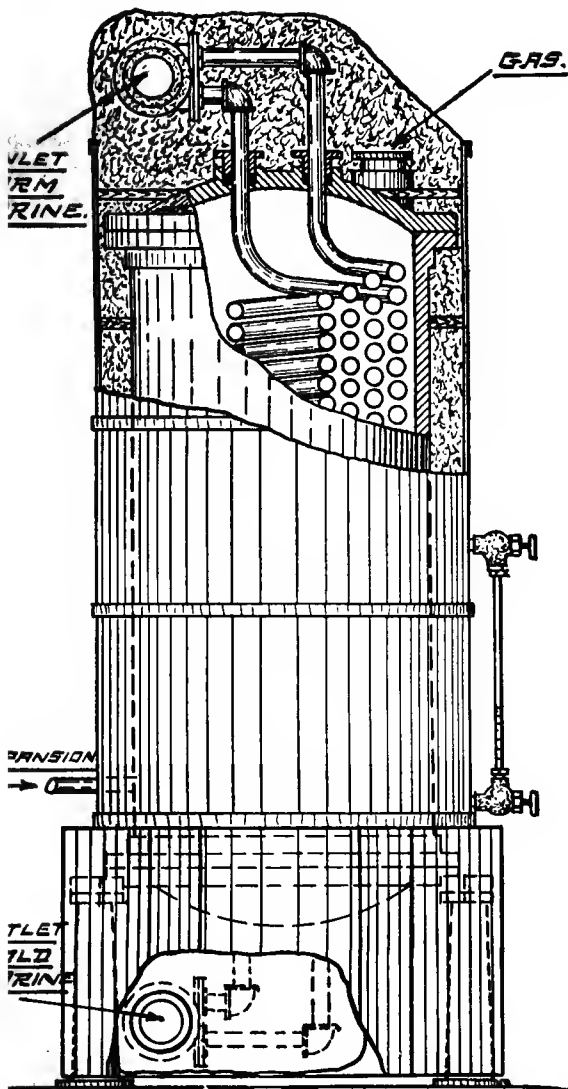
ISBELL-PORTER BRINE COOLER, SHELL TYPE.
